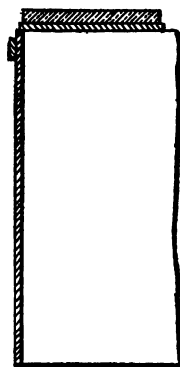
Application of heat-absorbing plates to prevent the warping of the sheets of a rectangular vessel during the welding operation.
